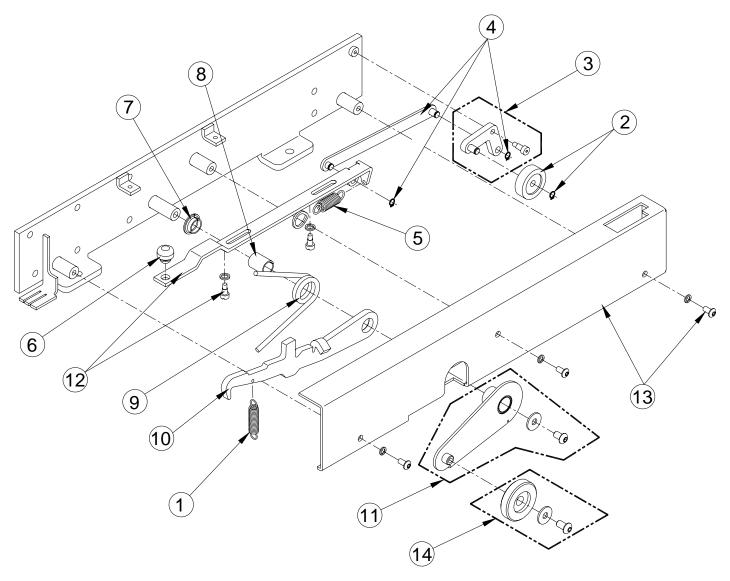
ROLLSTOP LATCH ACTUATOR ASSEMBLY 32DPH06.E
